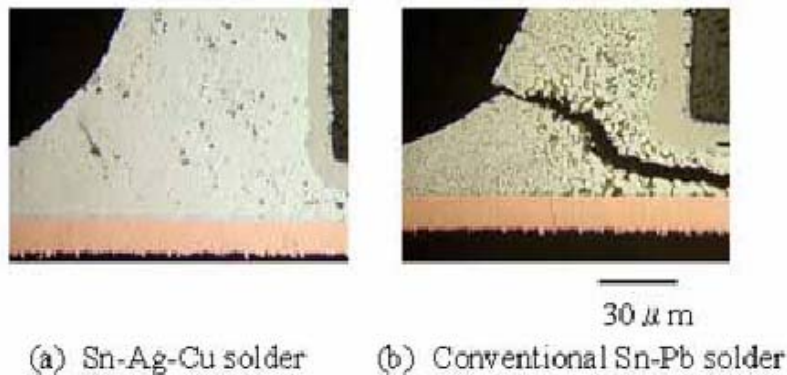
Cross-sectional Photographs of Chip Components Solder Joints after Thermal Cycle Test for 3,000 cycles 14
